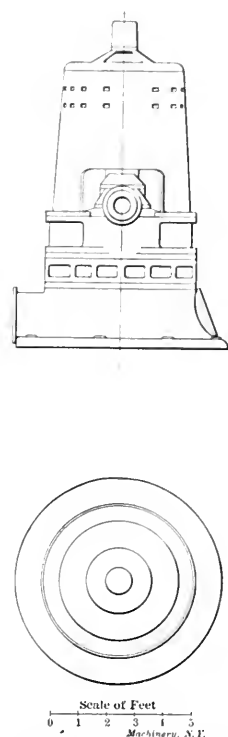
Plan and Elevation of 500 K.W. Center Turbine and Generator.
